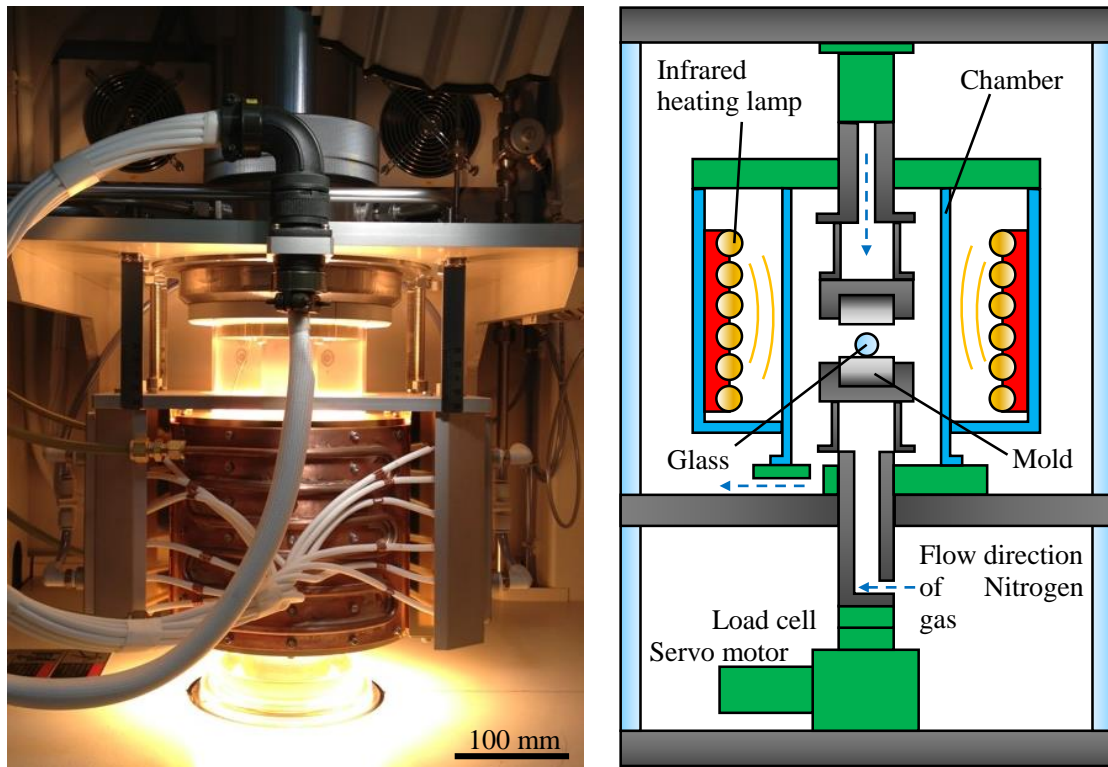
Illustration and photograph of optical glass mold press machine.
